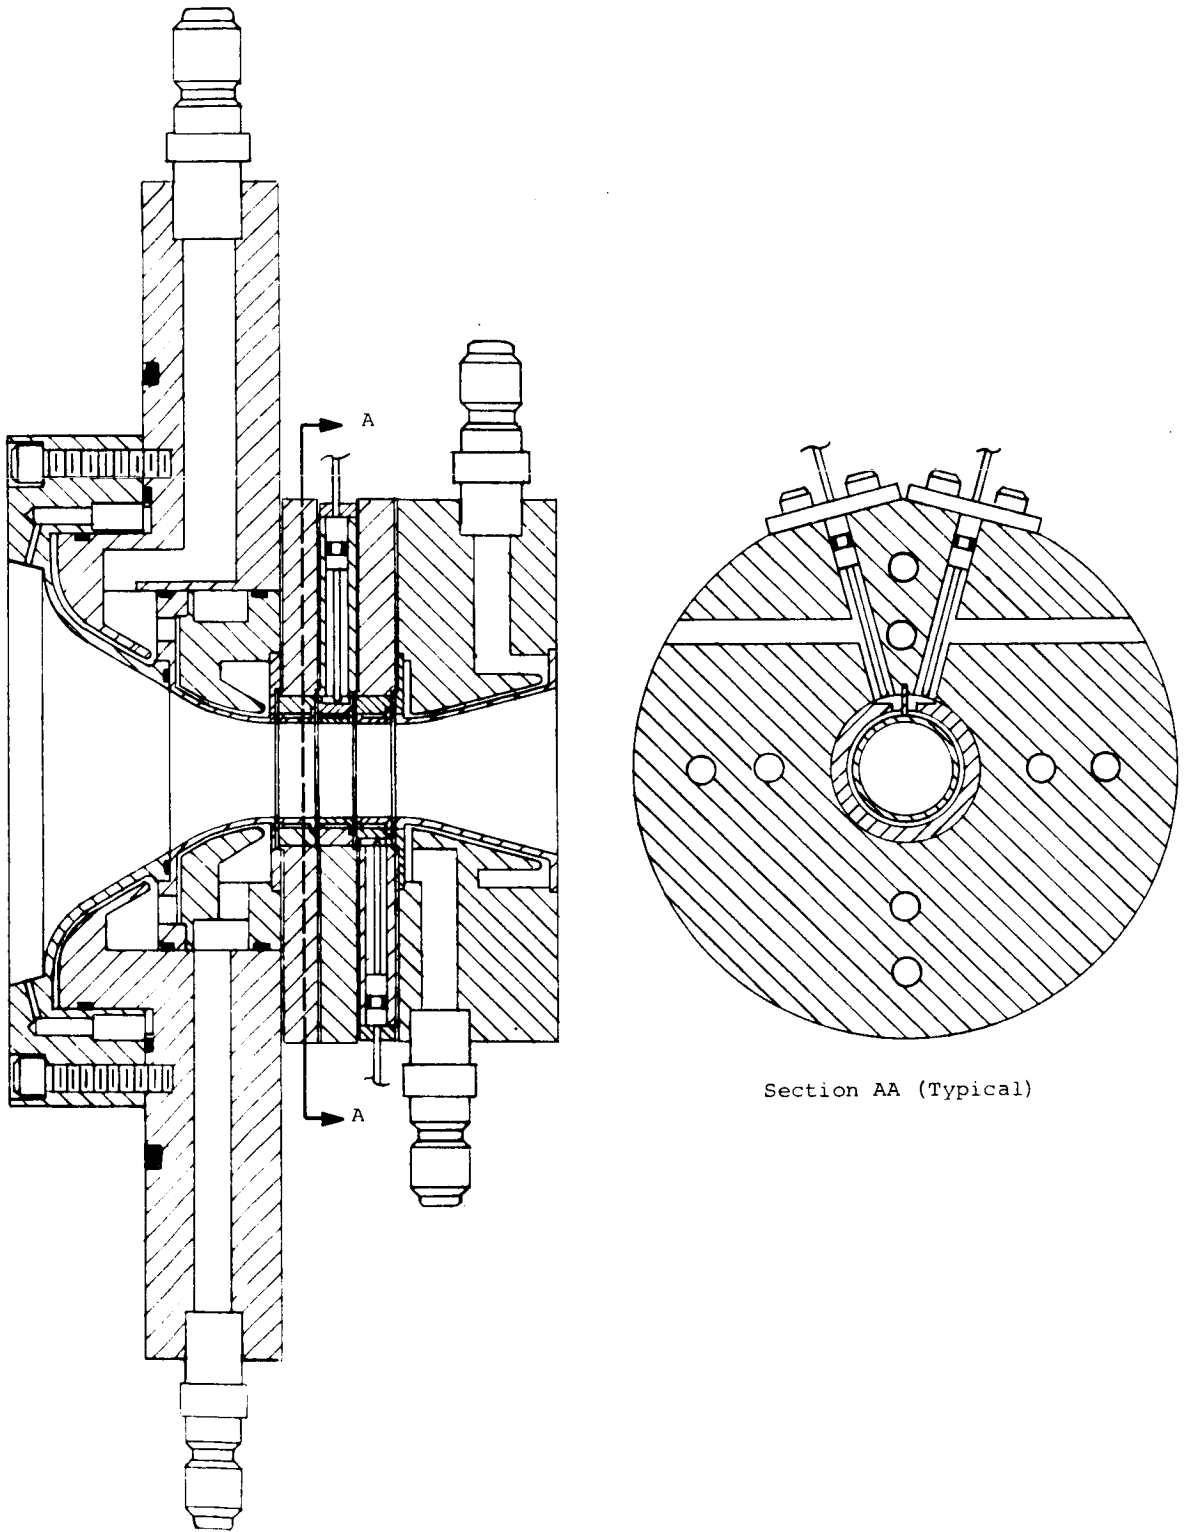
Schematic drawing of typical heat-transfer calibration nozzle.
